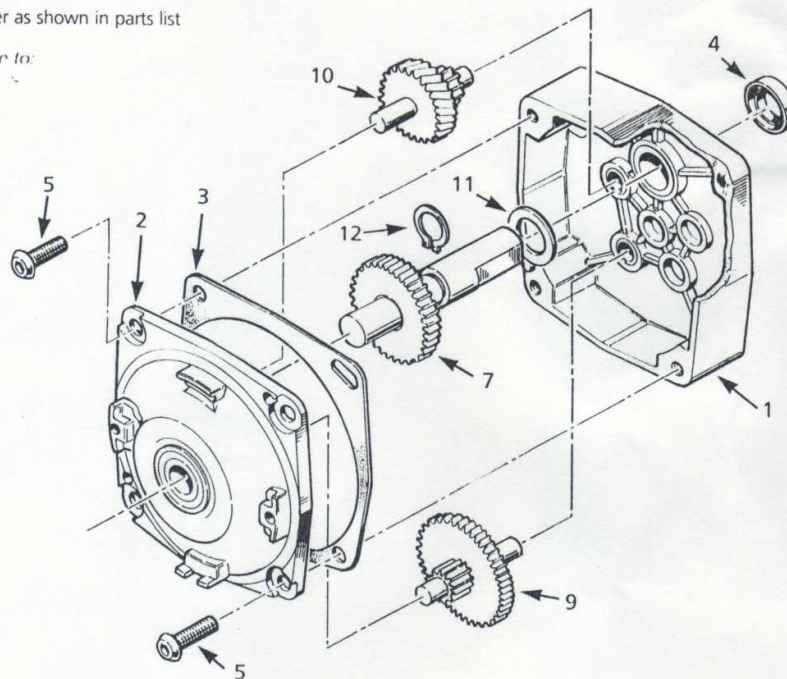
Gearbox Replacement Parts Illustration for Model 4Z064A
